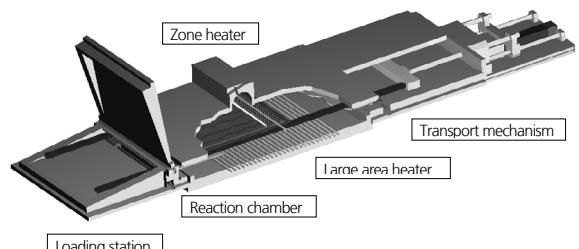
3D drawing of the ZMR400 processor, total length about 2500 mm
